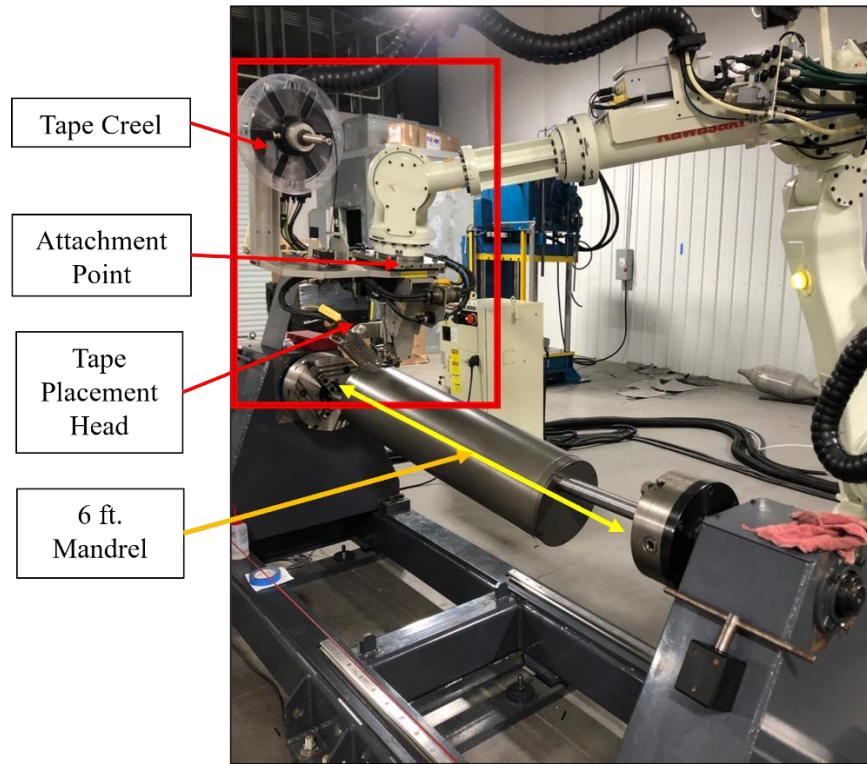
Photo of robotic arm and spindle working in tandem on a rotating off axis cylinder. This figure represents how the robotic system can move in complex motions to conform to complex mold geometries.
